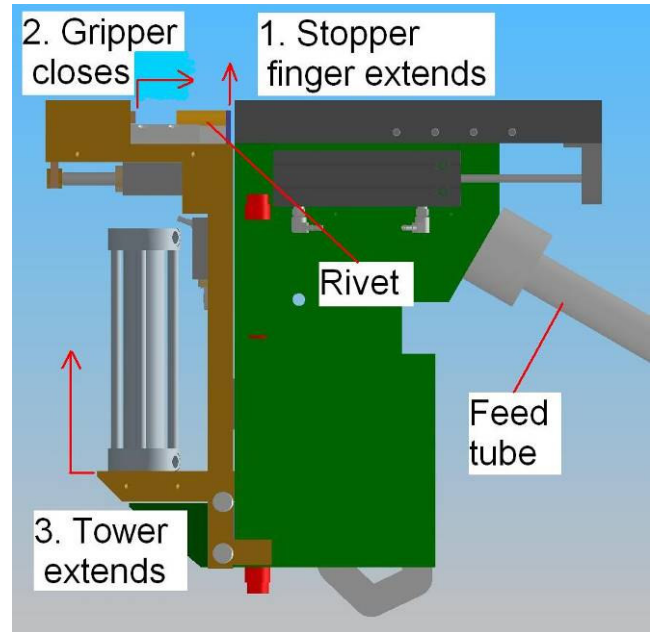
Gripper holds rivet lengthwise when it is fed to injector.
